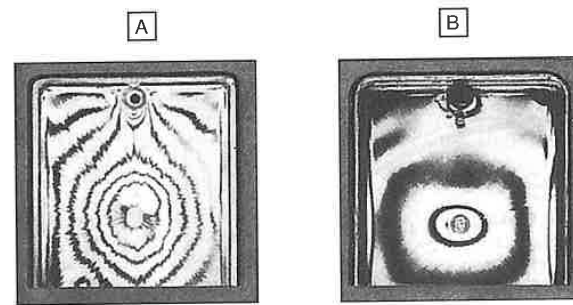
Isochromatics in polycarbonate parts molded with (left) piston-type and (right) screw-type injection molding machines.
